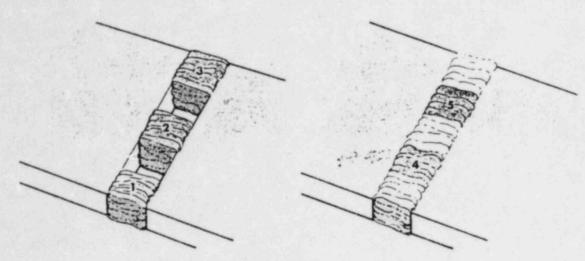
The intermittent weld, sometimes referred to as the skip weld, will prevent distortion.
